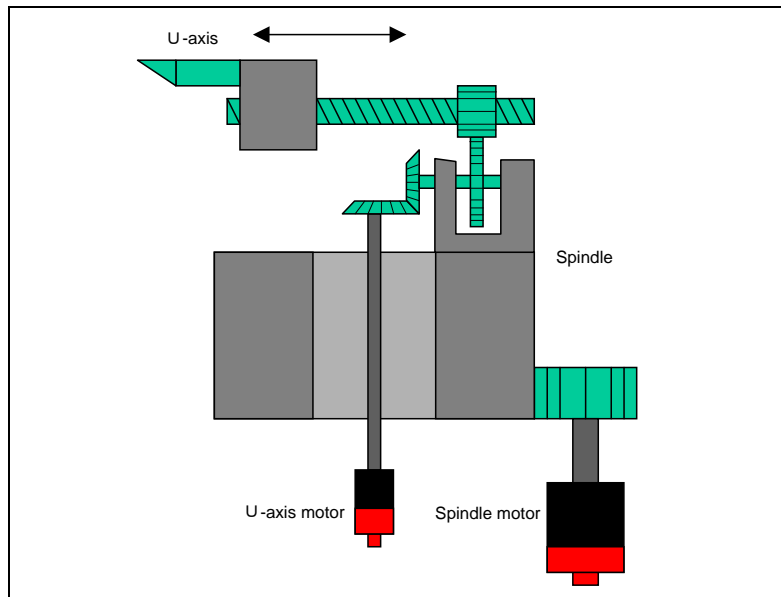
(b) Example of the structure of a machine having the U-axis
